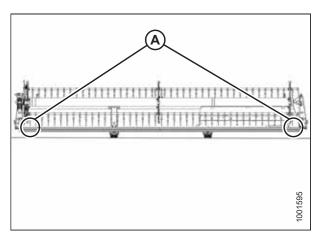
Measurement Locations for Single and Double Reels – Single Reel Shown
